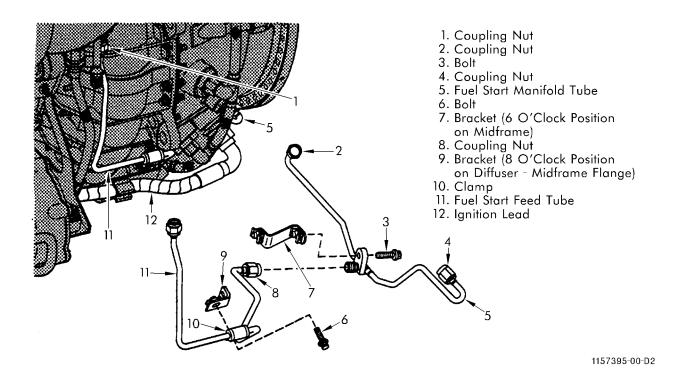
(T700) Fuel Start Feed and Fuel Start Manifold Tubes; Removal and Installation
